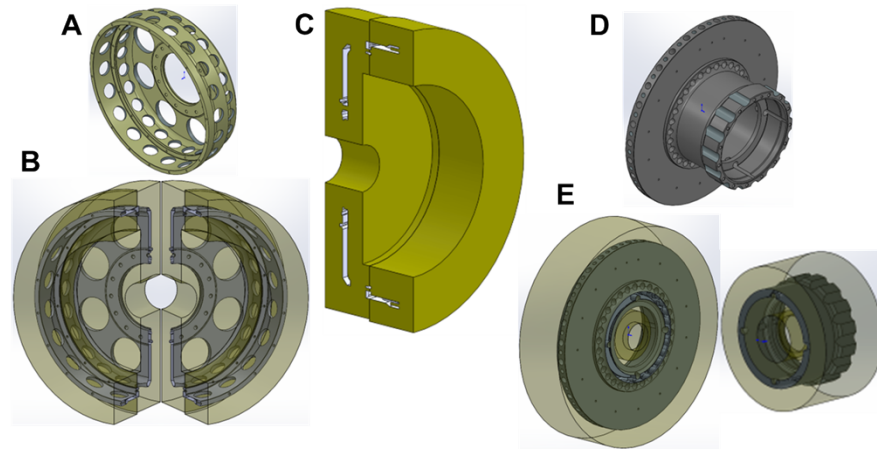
A) Cage for the 100kW magnetic gearbox and the B) topologically optimized sand printed mold for the part. C) The cross section of the four-part mold showing the mold void. D) Rotor for the magnetic gearbox and E) the topologically optimized sand printed mold for the two-part rotor mold.
